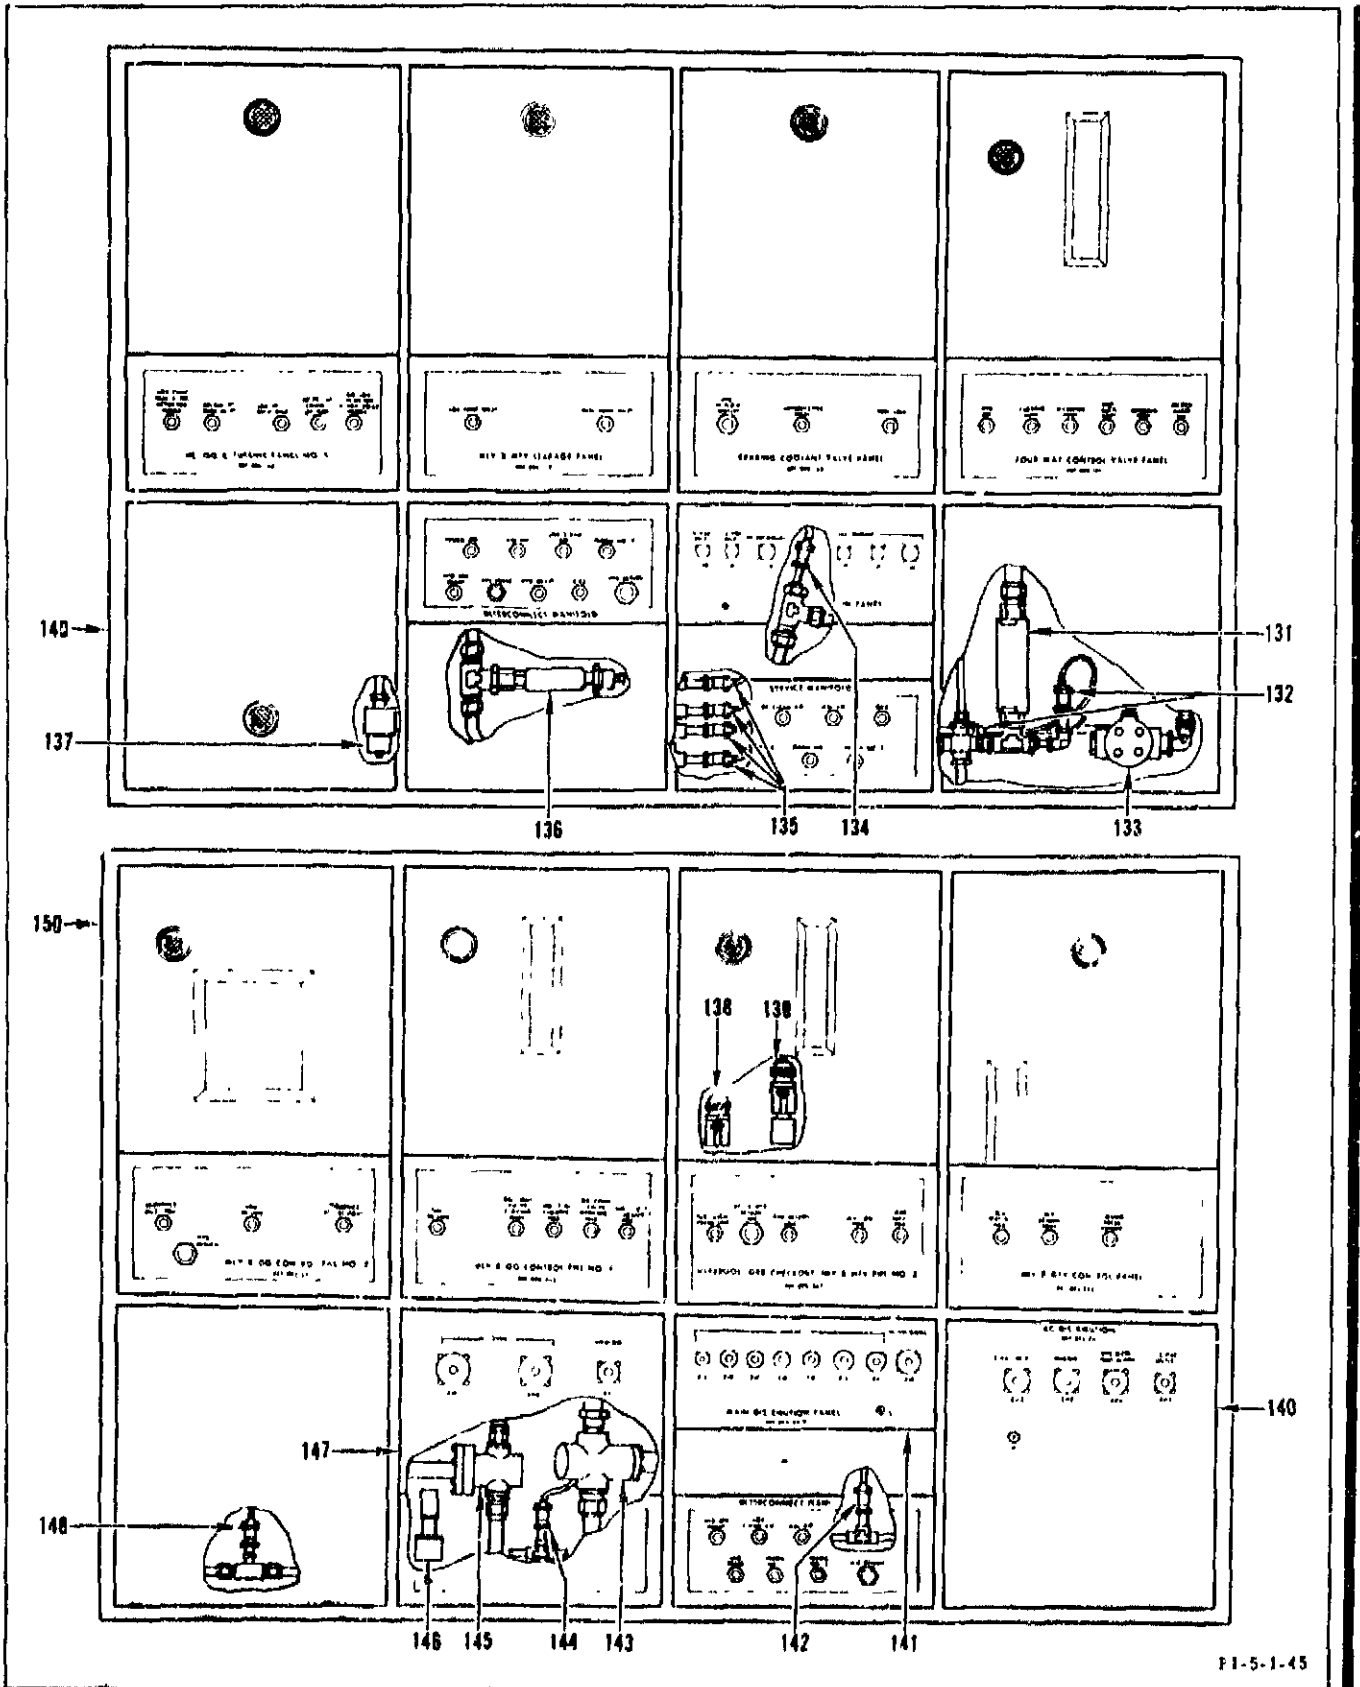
Disassembly of Engine Checkout Console (Sheet 4 of 20)
